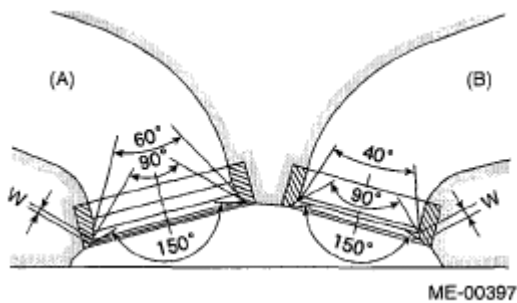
Inspecting Intake And Exhaust Valve Seats
